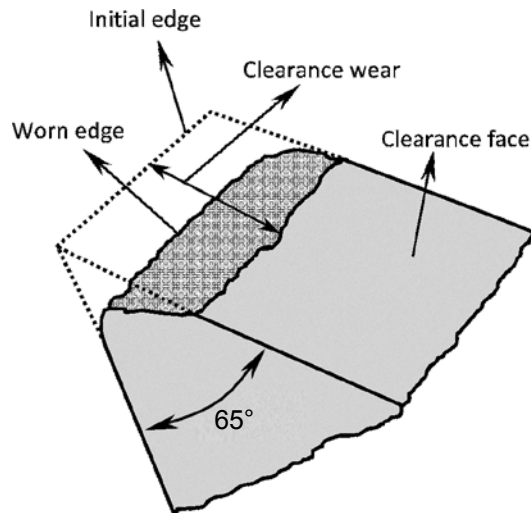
Schematic diagramme of wear measurement on the clearance face of cutting tool
